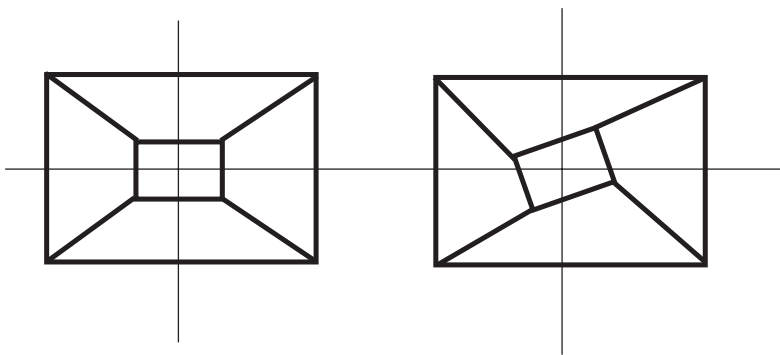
A schematic front view of the horn antenna already presented in Figure 13.5. Parallelism with a ϕ -symbol between the conical and straight parts would not prevent the possible twisting errors.
